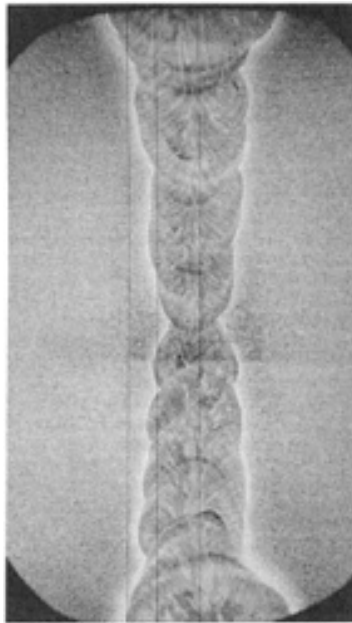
TYPICAL NARROW GROOVE WELD PRODUCED IN MECHANIZED WELDING APPLICATIONS
